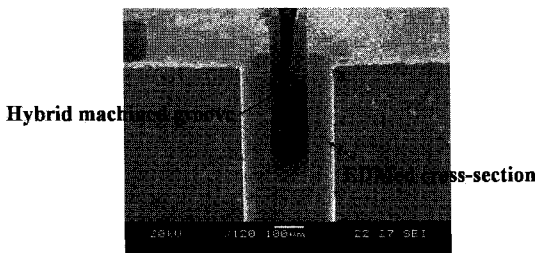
Cross section of a micro groove machined by hybrid milling of LBM & EDM
